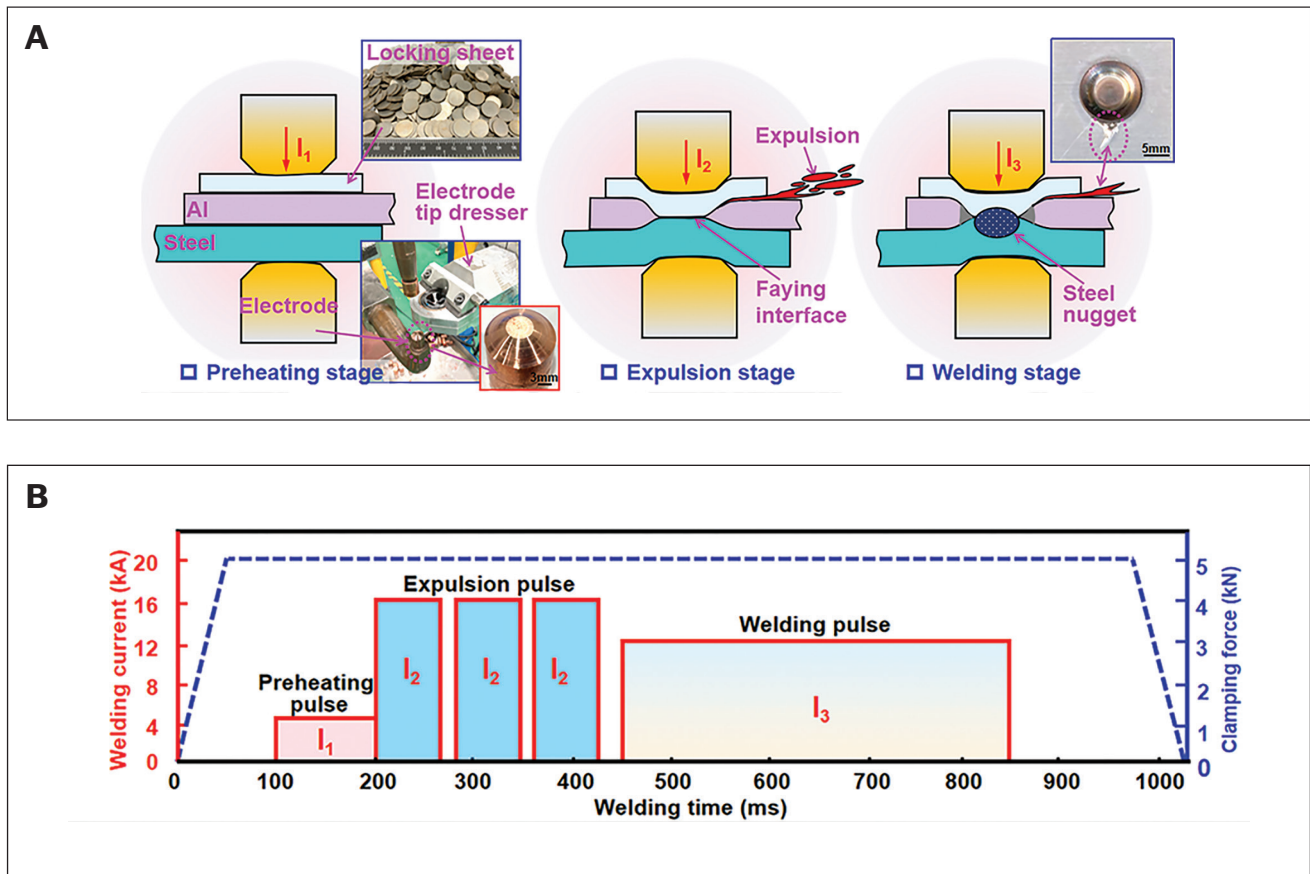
Schematic diagram and welding sequence of the AE-RSW process: A – The detailed AE-RSW welding process; B – the detailed welding schedule.
